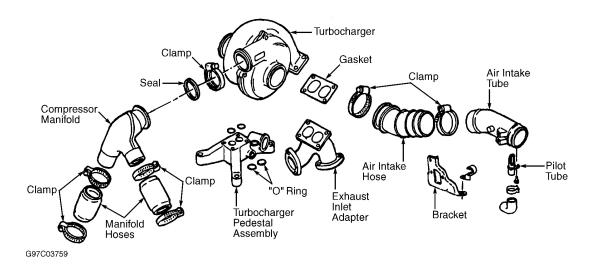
Exploded View Of Turbocharger Courtesy of FORD MOTOR CO.
